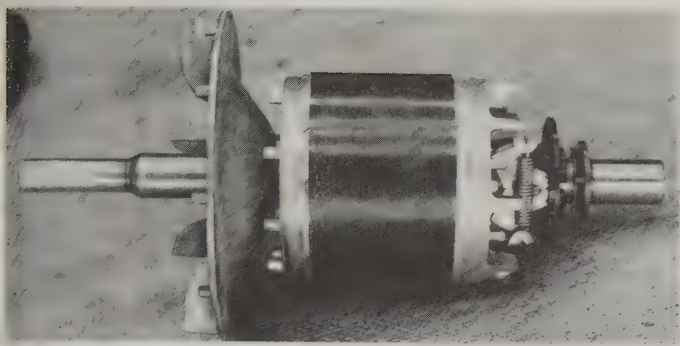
To provide cooling in an open-type motor, fan blades may be attached to the same shaft as the rotor.
